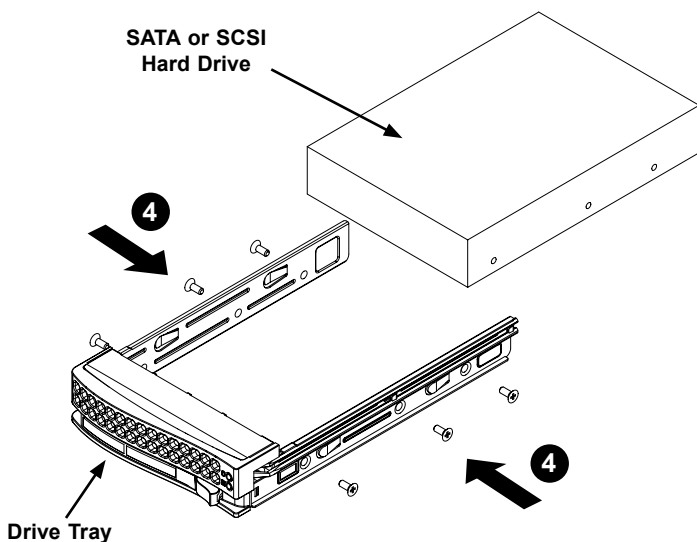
Installing the Hard Drive into the Hard Drive Carrier
